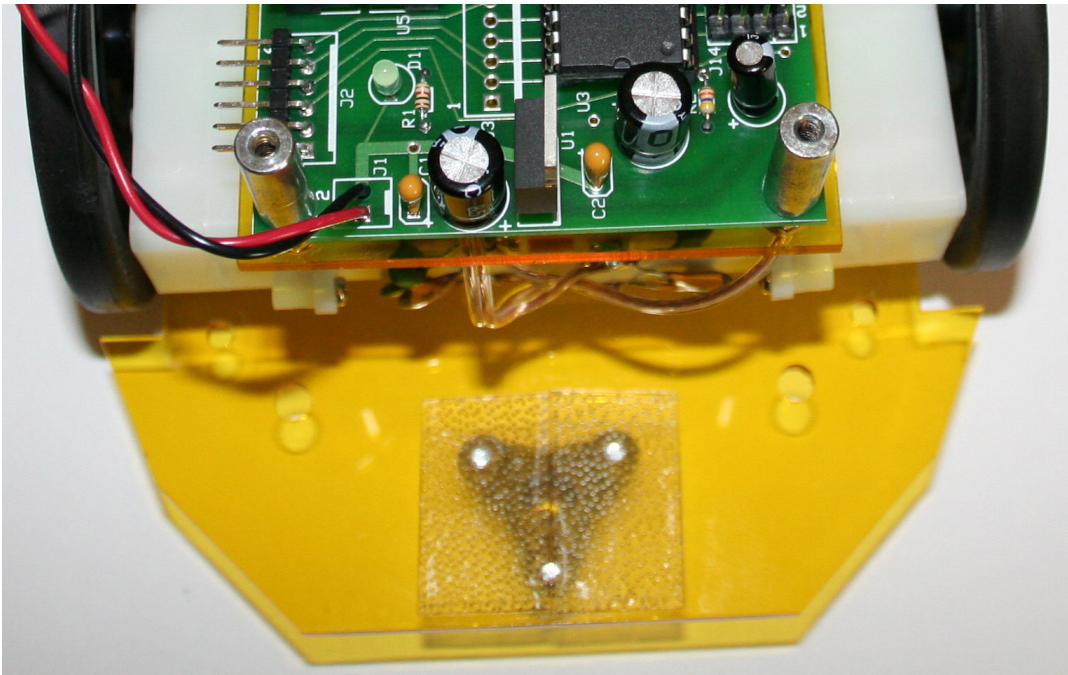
, Connect GP2D120 sensors to the controller board.
